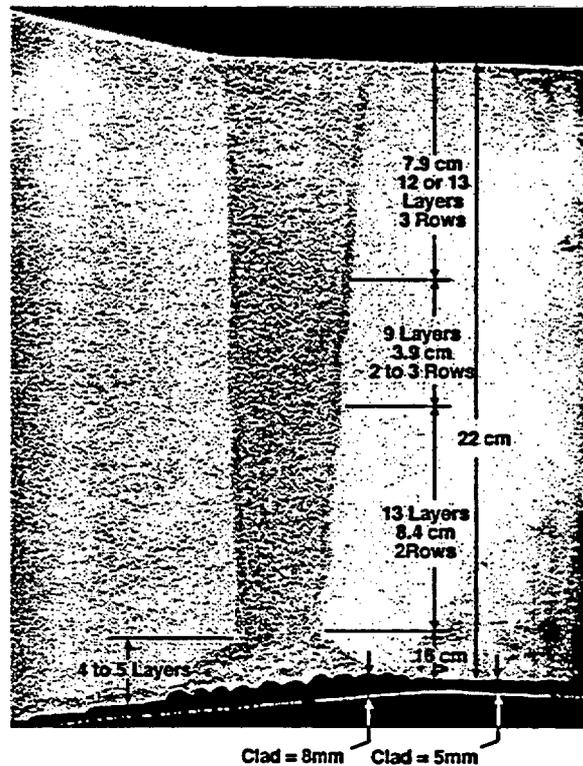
Cross Section of Weld Removed from PVRUF Vessel
